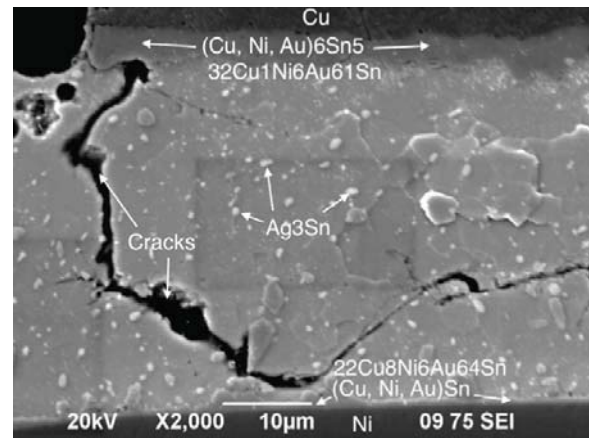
Fracture in bulk solder of a QFN on a flash Au board, after thermal aging for 56 days.
